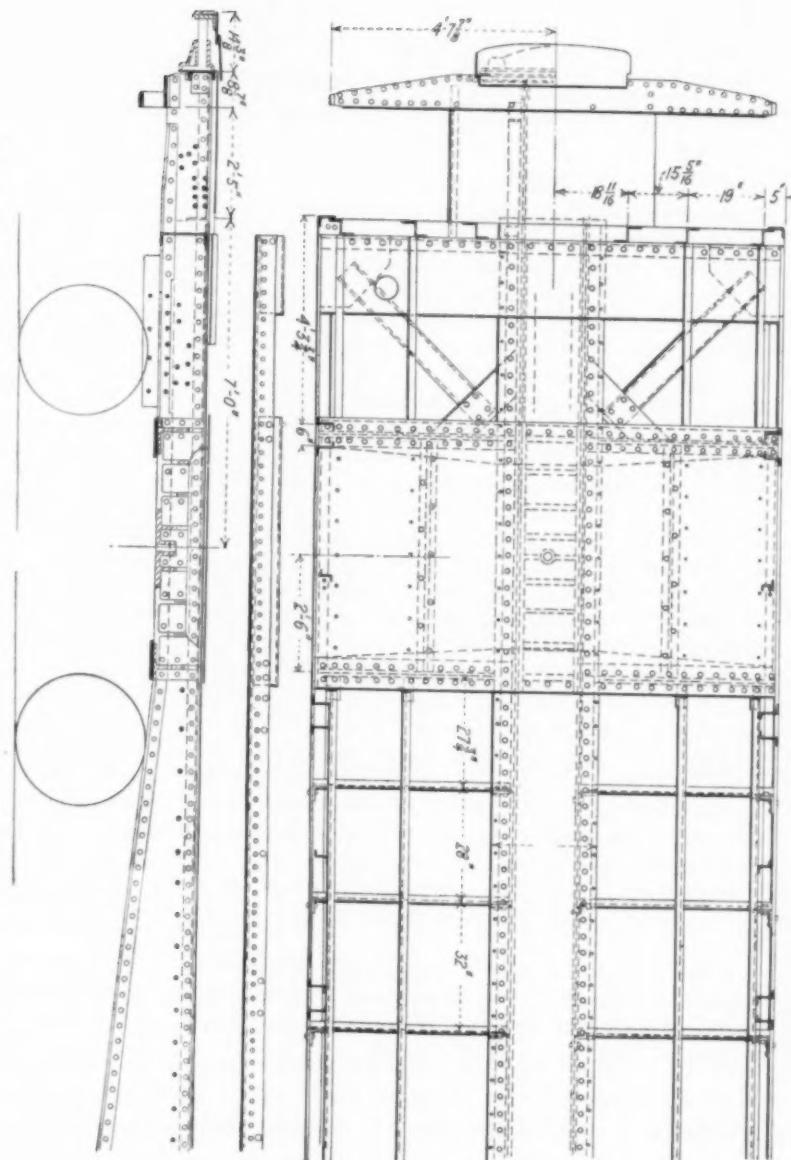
STEEL CAR CONSTRUCTION, CENTER SILLS EXTENDING FULL LENGTH OF CAR
